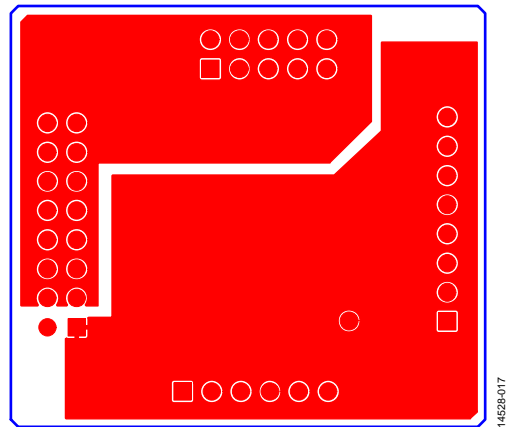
EVAL-AD5680DBZ Daughter Board Bottom Side Routing
